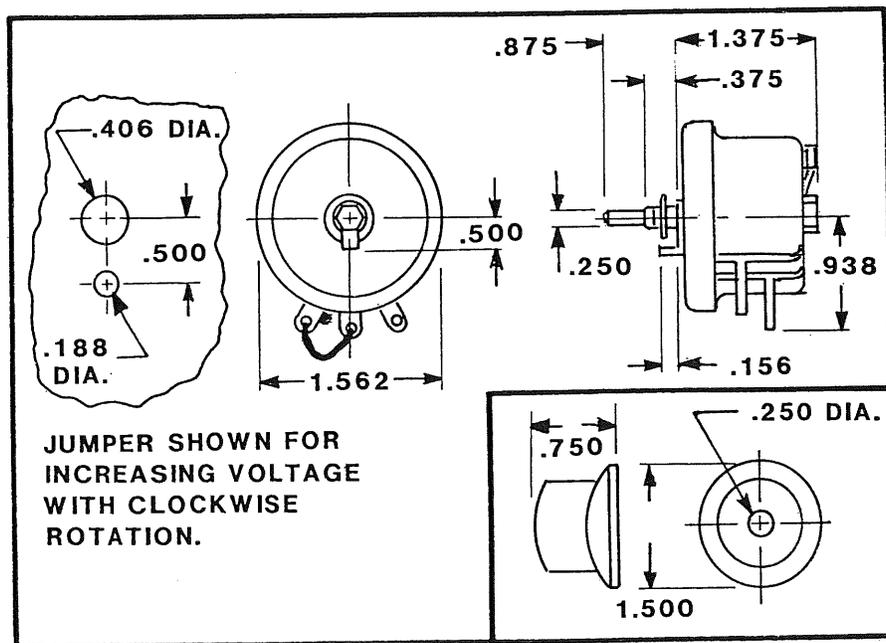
Outline Drawing, Voltage Adjust Rheostat P/N 06874
